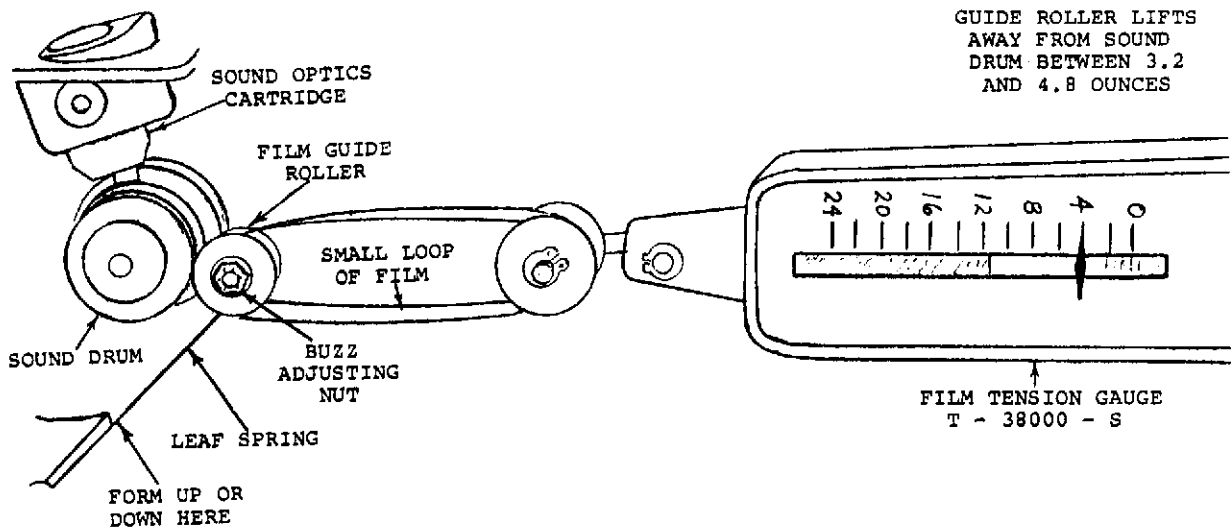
PRESSURE ROLLER ARM ADJUSTMENT
